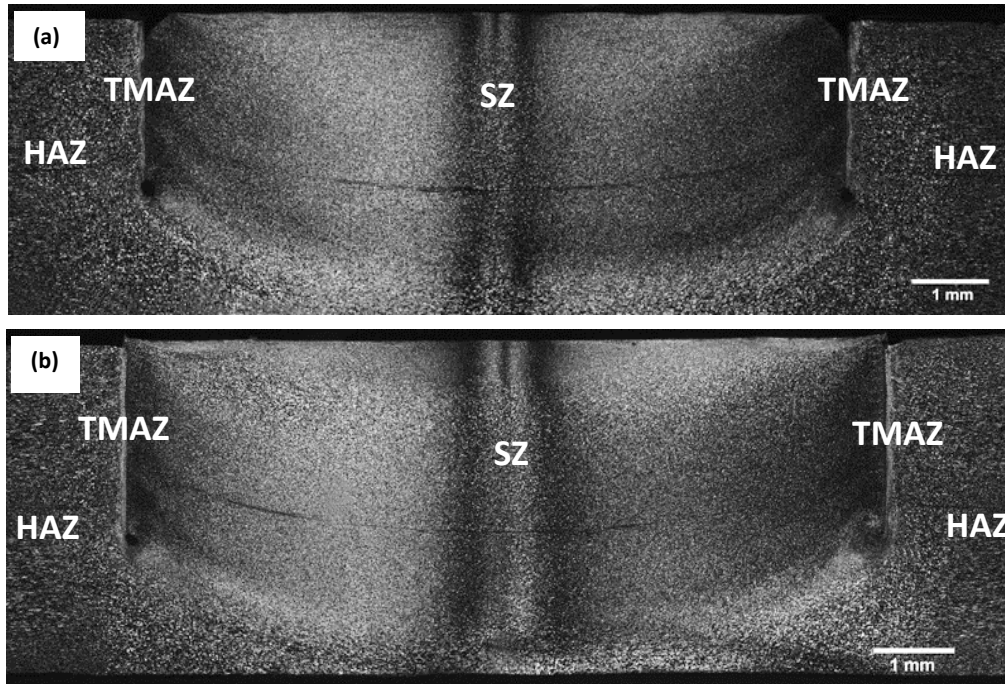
(a) Macrograph of welding condition 10; (b) macrograph of welding condition 15.
